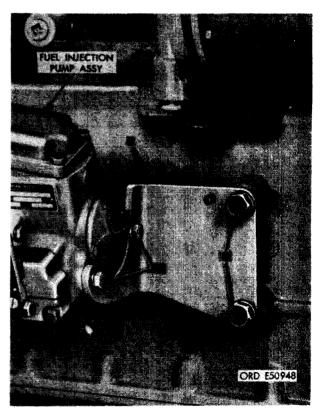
REMOVING OR INSTALLING FUEL INJECTION PUMP BRACKET (EARLY MODEL ENGINES).
